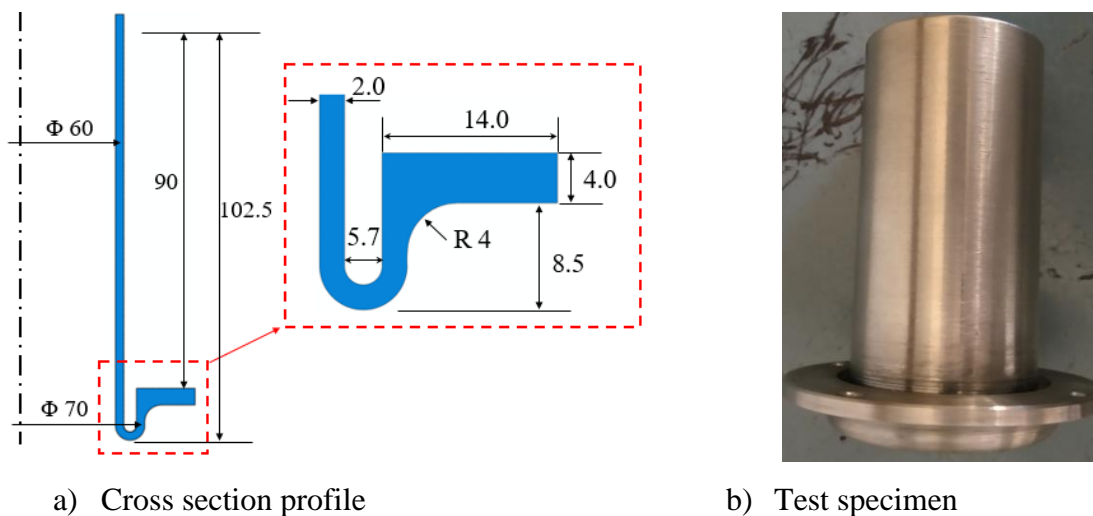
Inversion tube geometry and test specimen of Variant -2 (dimensions in mm)
